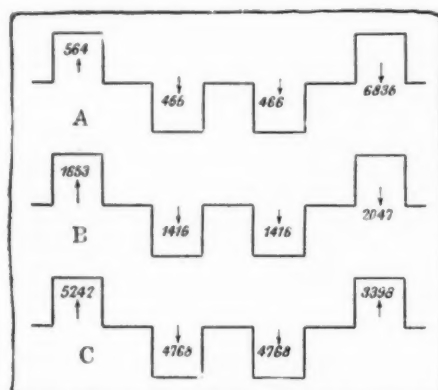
Maximum forces producing bending stresses of crankshaft and pressures in shaft bearings
